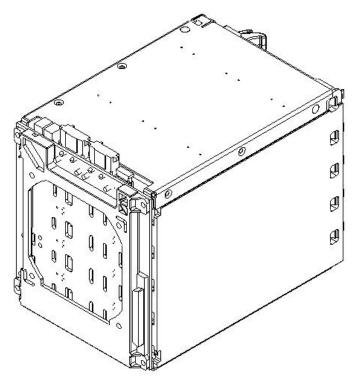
Hot-swap Drive Bay, Rear Isometric View
